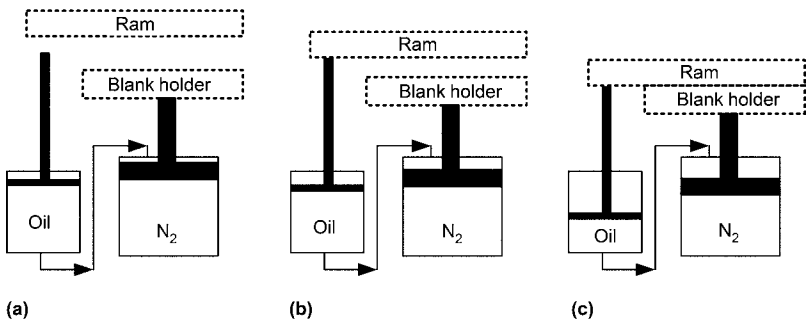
Preacceleration of the blank holder using nitrogen cylinders: (a) initial setup; (b) preacceleration; (c) ram catches blank holder. Source: Ref 13.24
